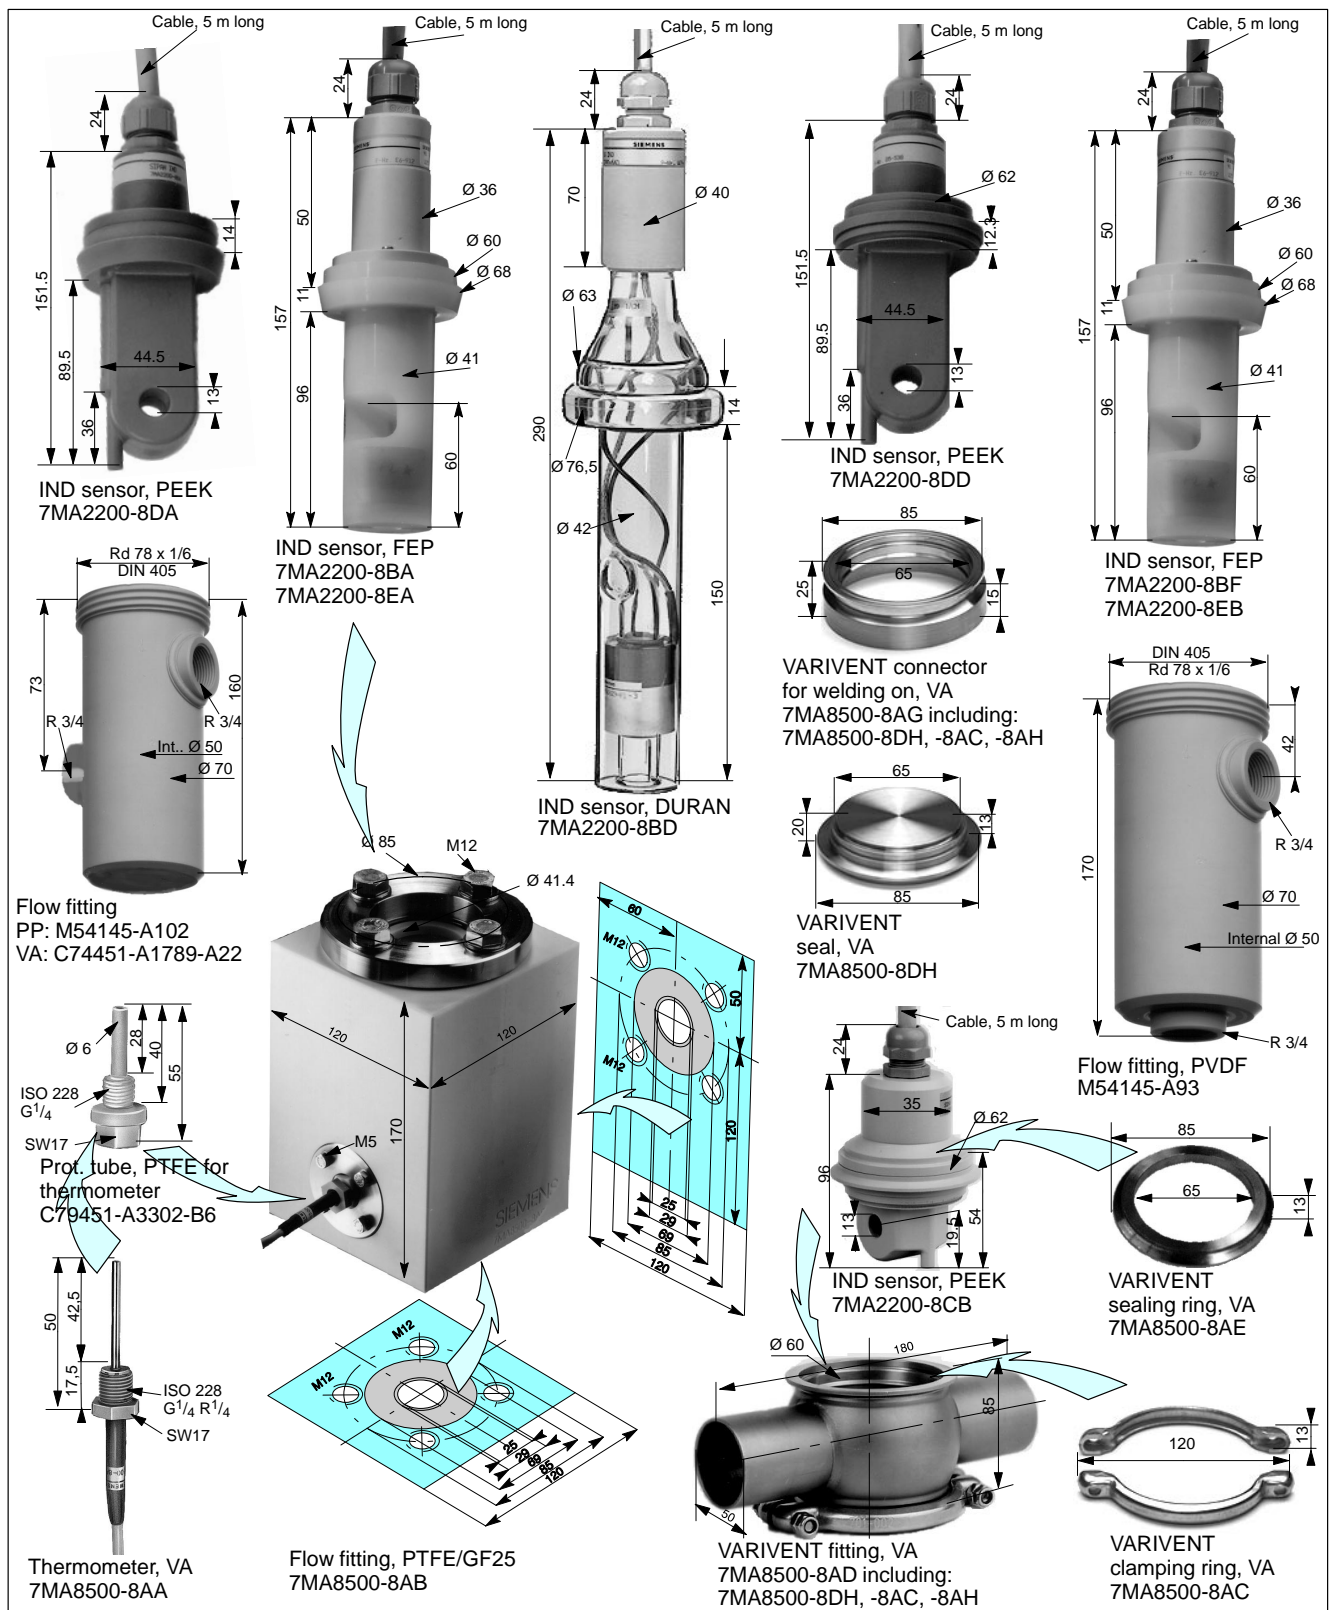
/25 IND sensors, fittings and accessories, dimensions
